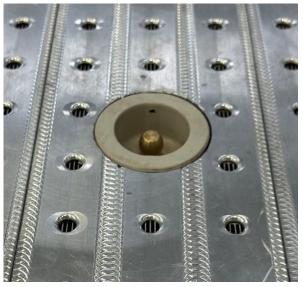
Grounding Point Inserted in ILDFA Floor Profile
